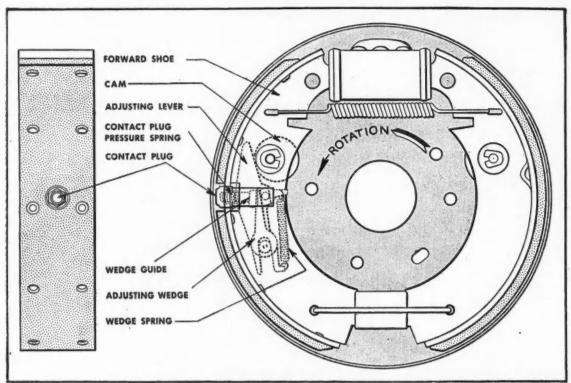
New Wagner brake showing location and parts of self-adjusting device. Parts in dotted lines are shown in Fig. 2
